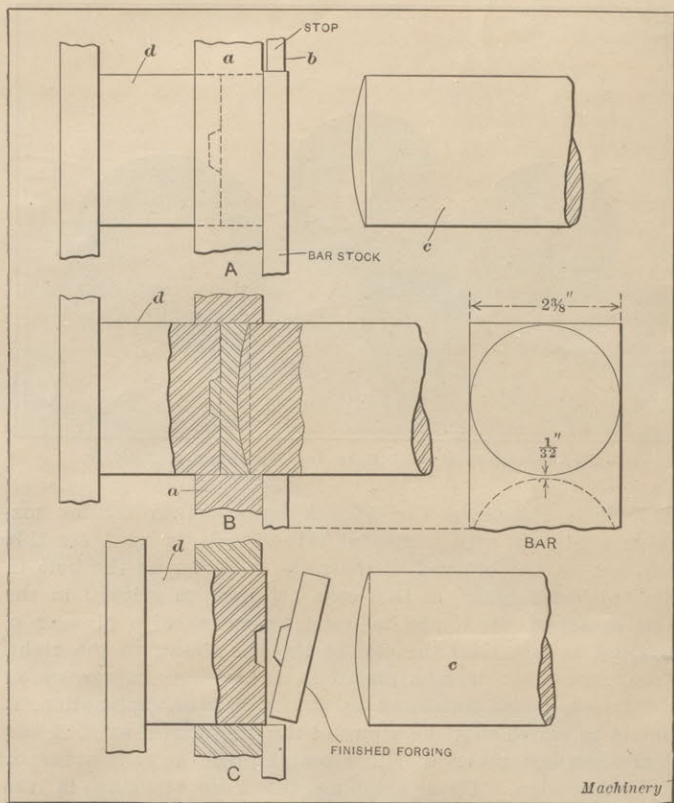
Diagram illustrating Method of making Shrapnel Shell Diaphragms in a Special Type of Power Forging Machine
